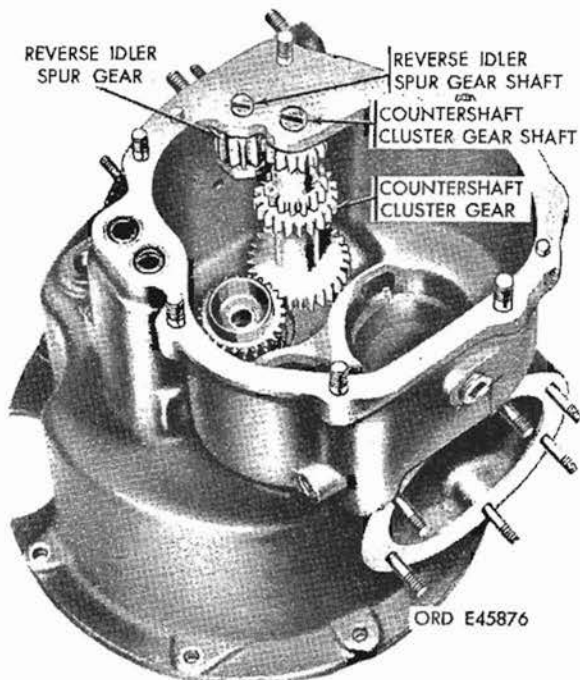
Reverse idler spur gear shaft and countershaft cluster gear shaft installed in axle and transmission housing.
